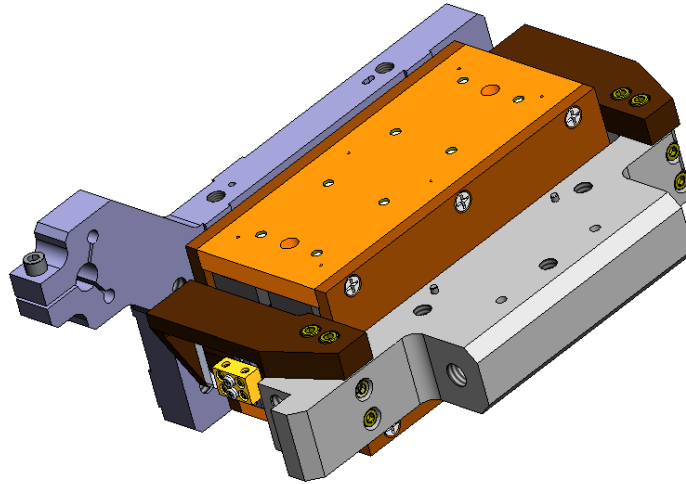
D0901103 Stage 0-1 Vertical Actuator Assembly per E1000394 (D1000290 Actuator Tooling Bracket)
